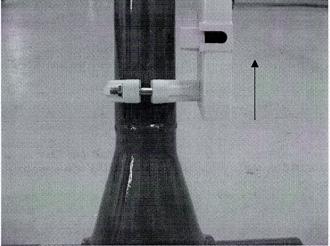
Basket Adjustment Step 2 – Forward Fitting Aligned (Aft beam moved up to align forward fitting with keyway)
